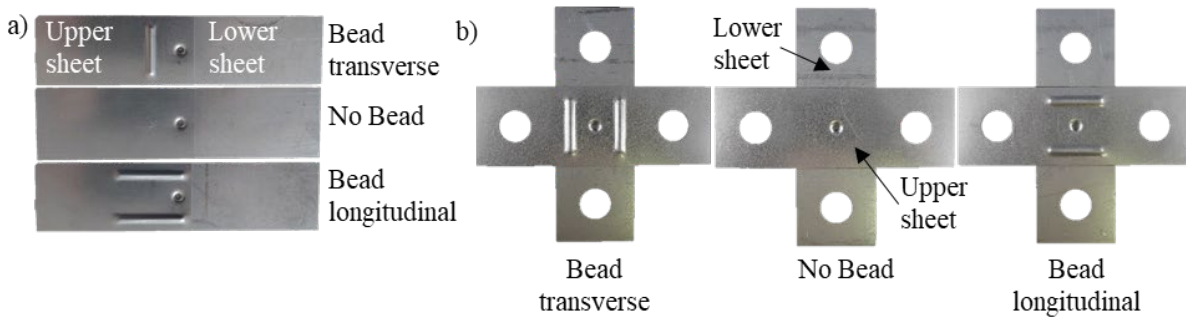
Specimen for a) Shear tensile test, b) Head tensile test in the variants no bead, bead longitudinal and bead transverse
